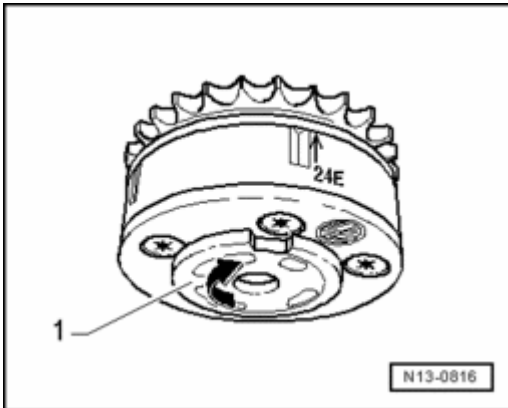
Turning Sensor Wheel At Intake Camshaft Adjuster To The Right
